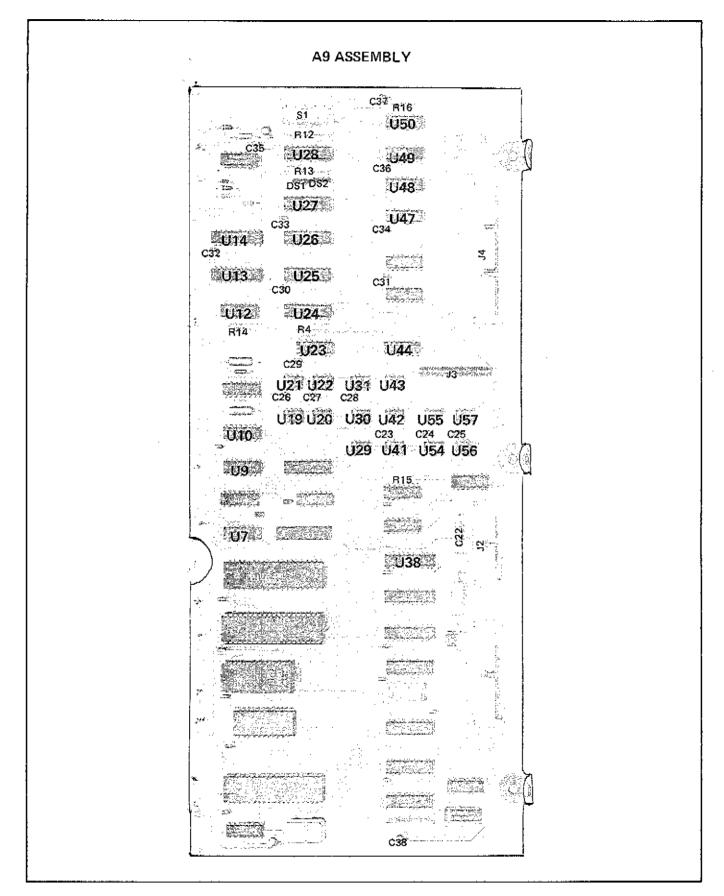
P/O Microprocessor Board Assembly Component Locations (P/O Change A)
